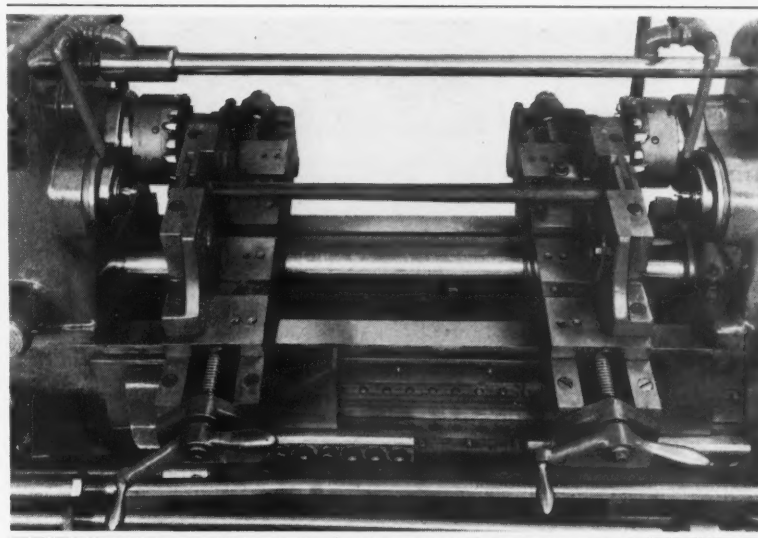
Close-up View, Showing the Former Blocks for the Work-holding Units
